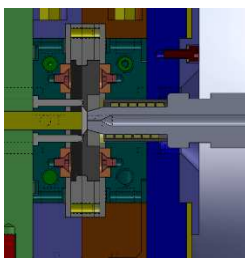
CAD detail of the long nozzle reaching the partition plan.
